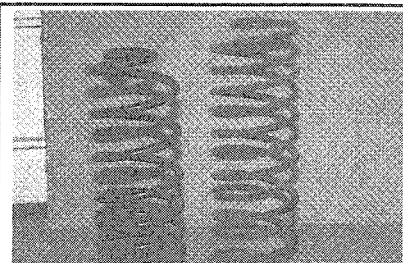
Do not be fooled by the unsprung length of a new spring. The new spring is shorter, it is a heavier duty design. It will not compress as much as the old spring and the car rides higher in the rear
